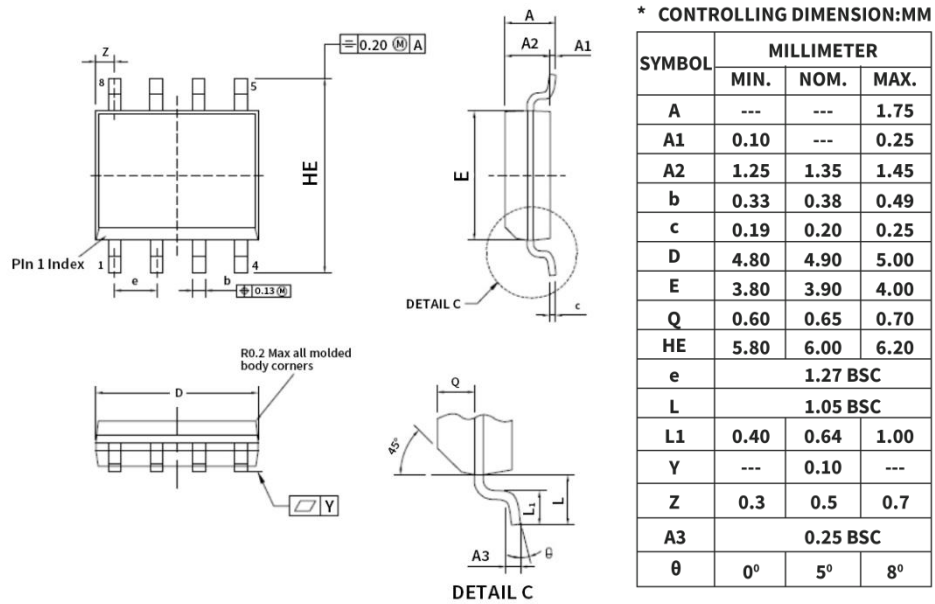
SOP8 Package Shape and Dimension in millimeters
